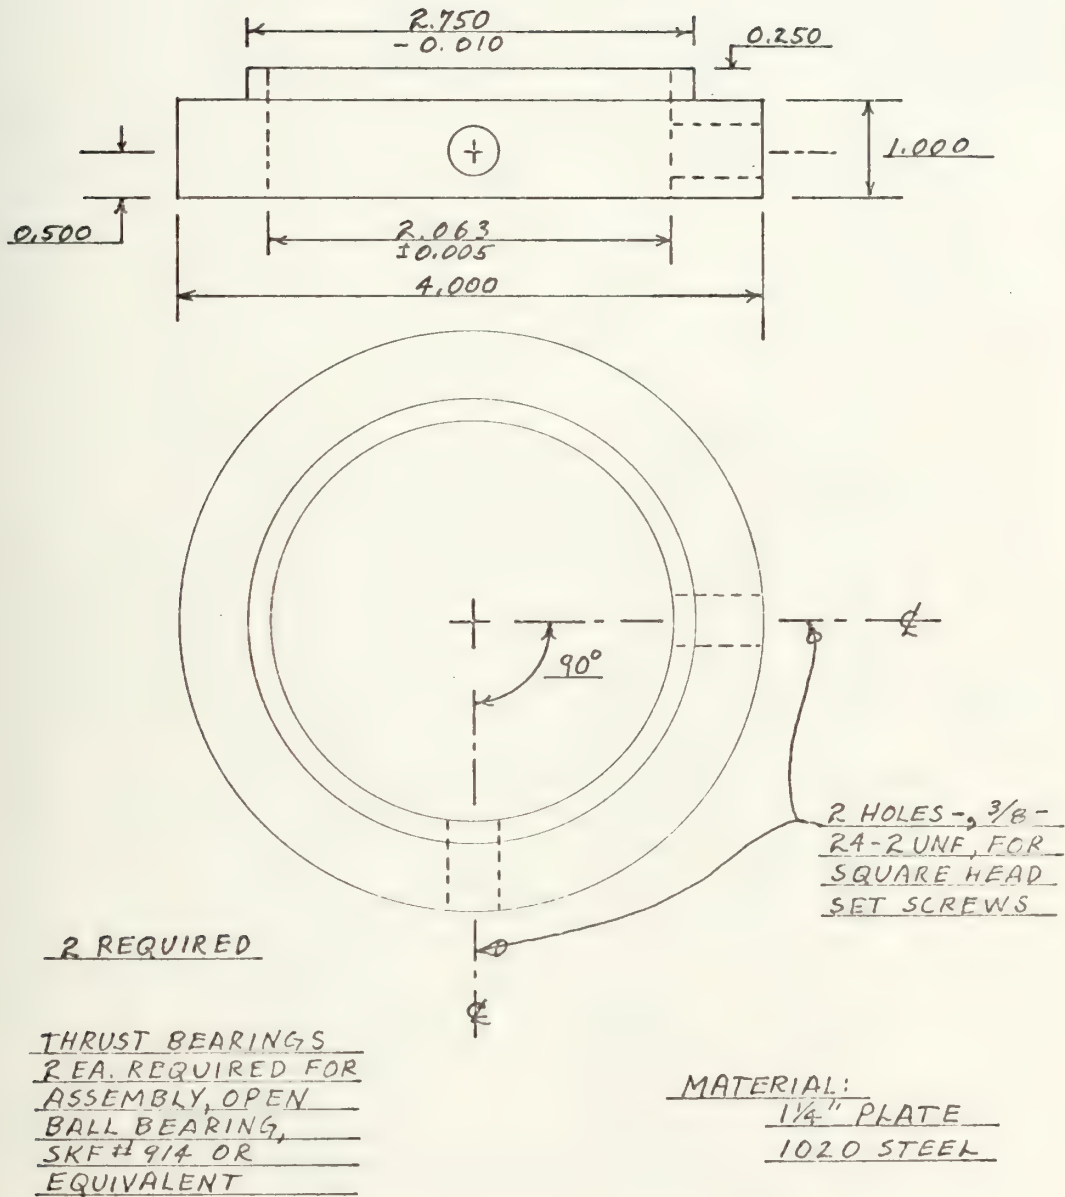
PIECE I-2-1, THRUST COLLAR
